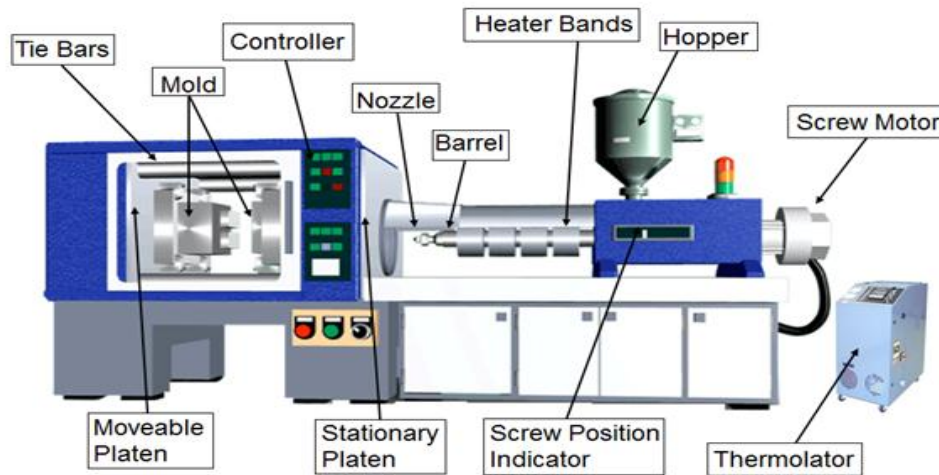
Injection Moulding machine used for the preparation of Test Specimens.
